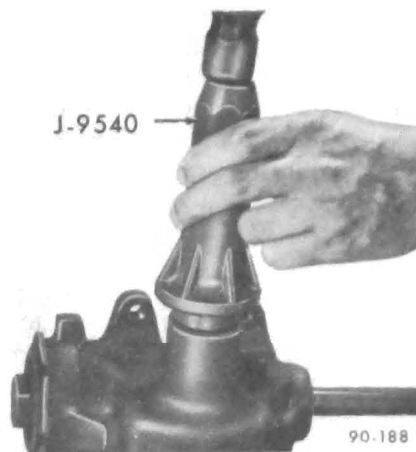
Installing Pitman Shaft Seal - Shaft Installed
